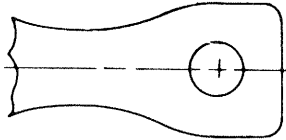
Strap Pack Lamination Inspection. (sheet 1 of 2)
